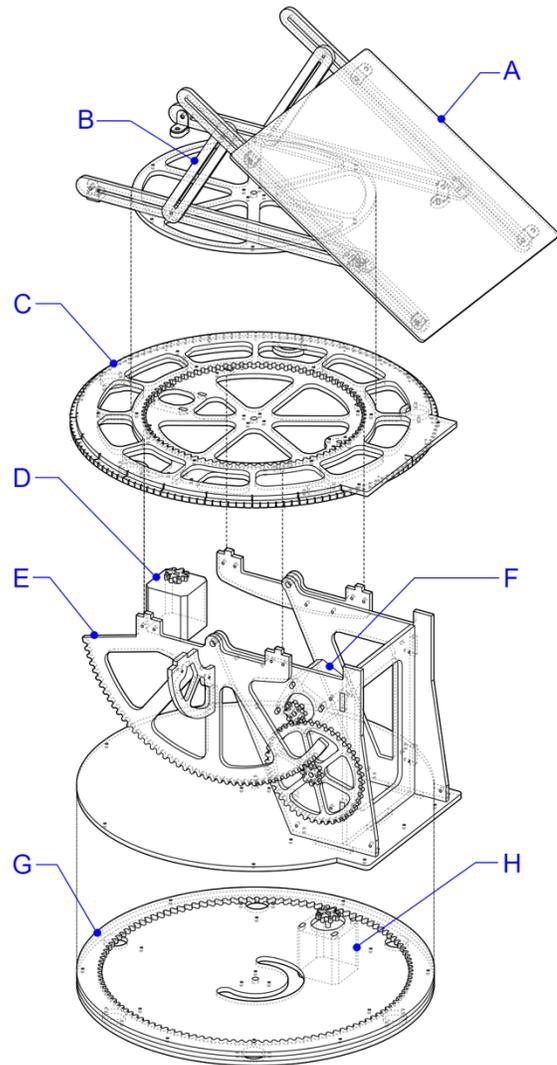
Exploded isometric view of the Solar Heliodon showing (A) model base plane, (B) latitude adjustment, (C) hourly adjustment, (D) stepper motor, (E) seasonal adjustment in solar altitude angle, (F) stepper motor, (G) sun-tracking adjustment, and (H) stepper motor.
